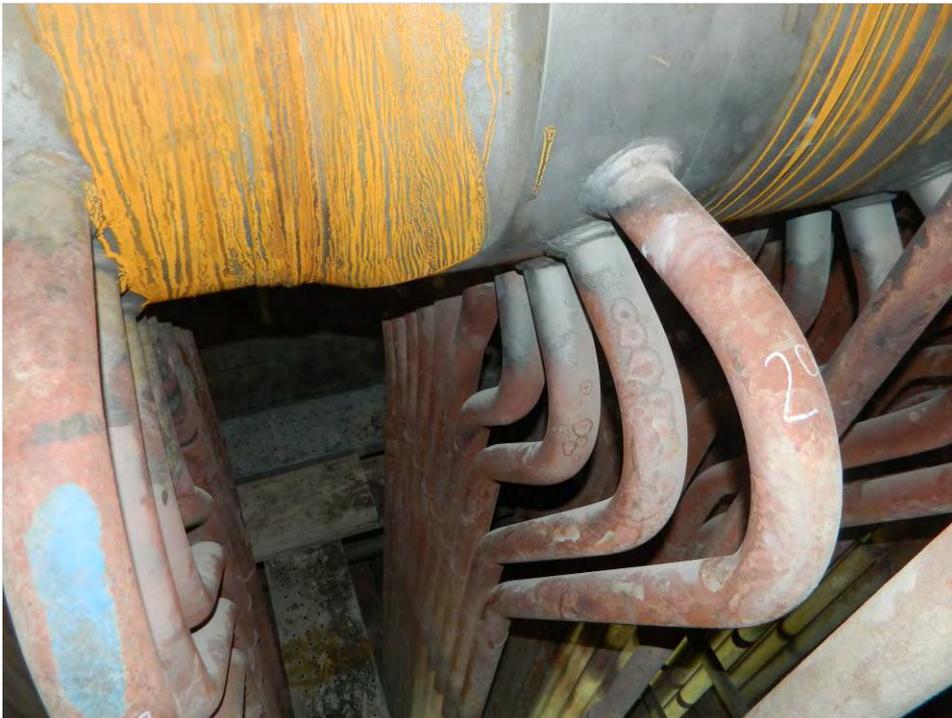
Photographs of the Finishing Superheater Inlet header and tubing.
